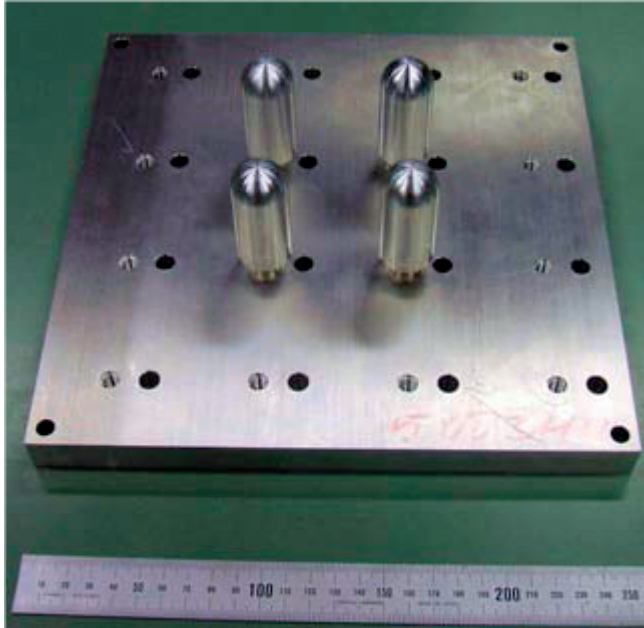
Mould for small size electrodes, top part, 4 electrodes mounted.
